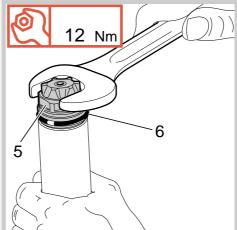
Fit the preload sleeve (16) and the top washer (9) into the stanchions.	FIG. 25 Lubricate the O-ring (6) on the cap (5). Turn the plunger (8, see exploded view) inside the cap counterclockwise until it is at its minimum setting. Assemble cap, together with O-Ring (5), onto stanchion tube by hand. Tighten to 12 Nm. Install fork legs into crown and upper crown as specified in section "INSTALLA- TION".
